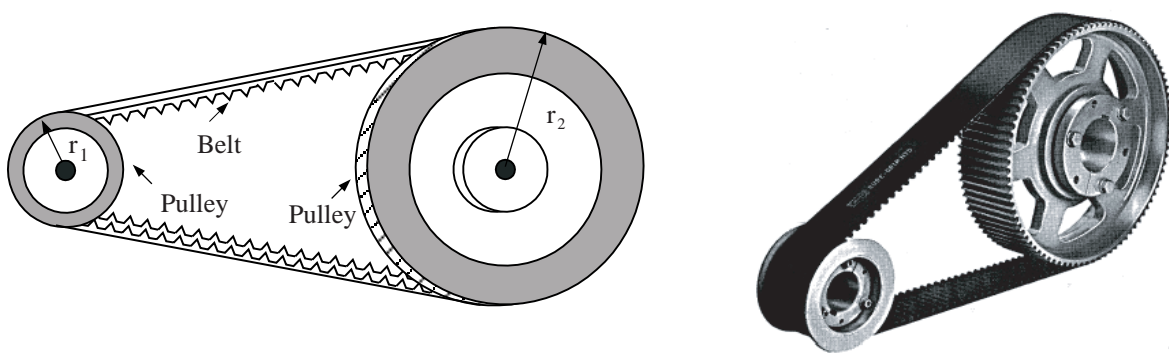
Rotary to rotary motion conversion mechanisms: timing belt and toothed pulley.
